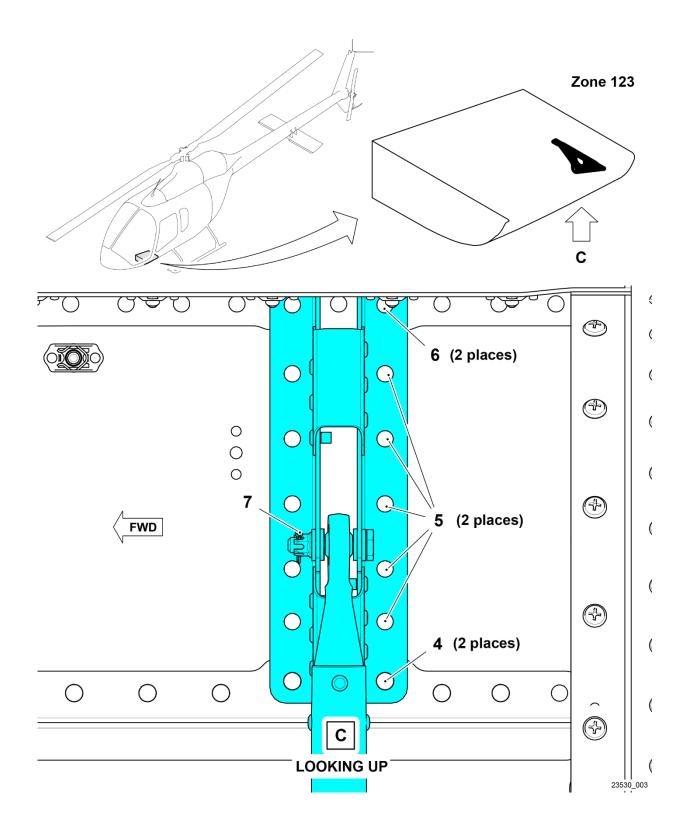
Cyclic Control Tube and Fixed Support Assemblies (sheet 3 of 4)
